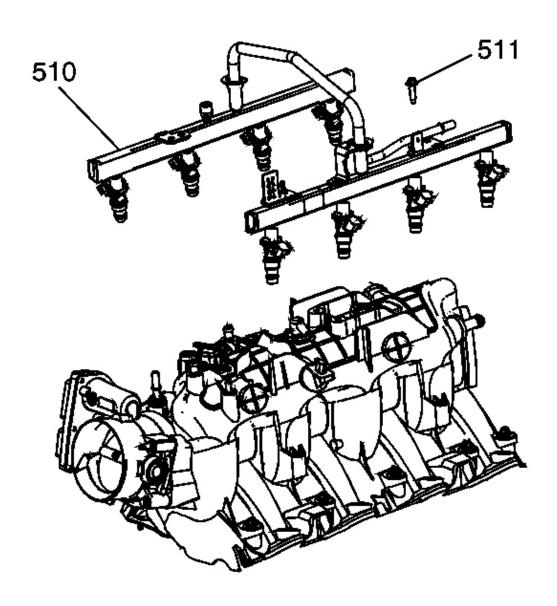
Fuel Rail Courtesy of GENERAL MOTORS CORP.
